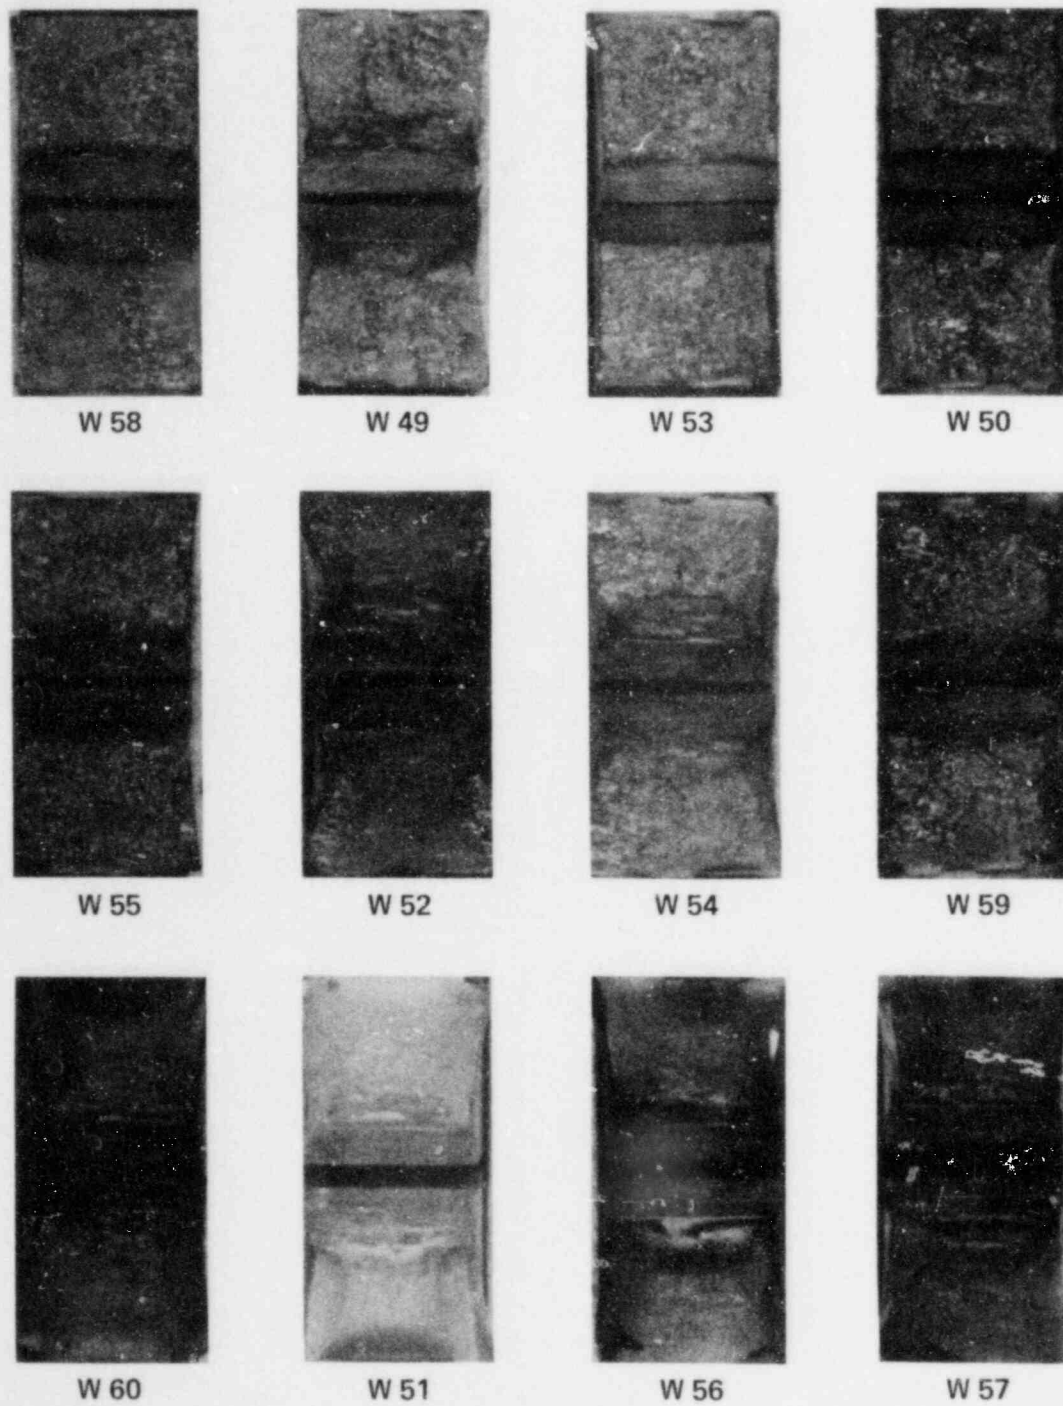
Charpy Impact Specimen Fracture Surfaces for Sequoyah Unit 2 Weld Metal
